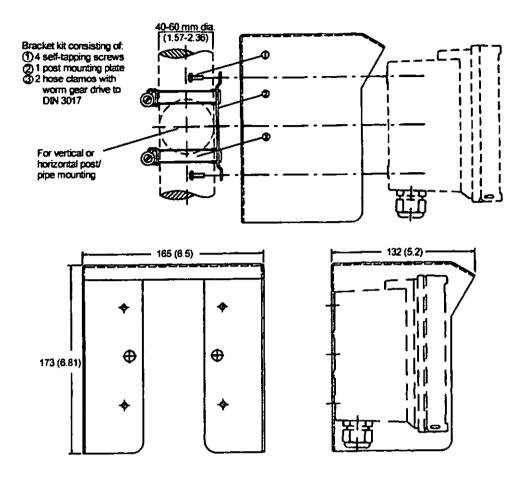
Dimension Drawing for APT4000 with Wall or Pipe Mounting
